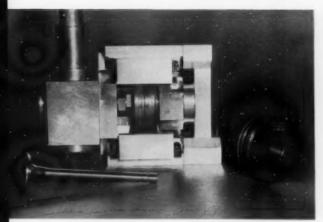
Fixture for dressing grinding wheels uses a shaped diamond wheel to dress the required form. Finished product, a valve stem, is shown in foreground. Six million were produced by one dresser.
